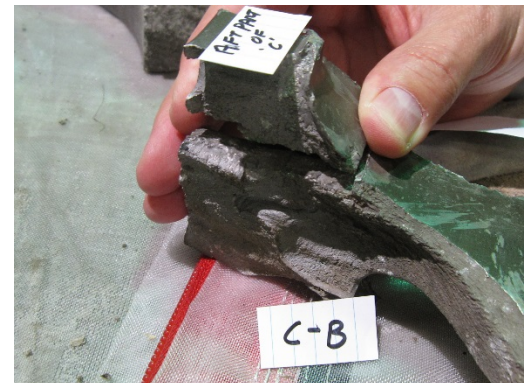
MATCHED FRACTURE SURFACES 'C'-TO-'B'
